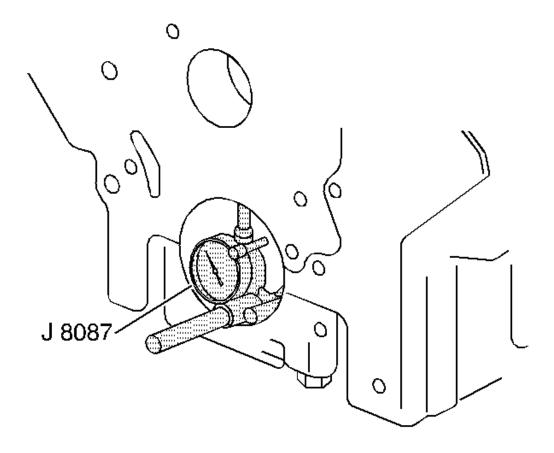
Inspecting Crankshaft Main Bearing Bores Courtesy of GENERAL MOTORS CORP.
